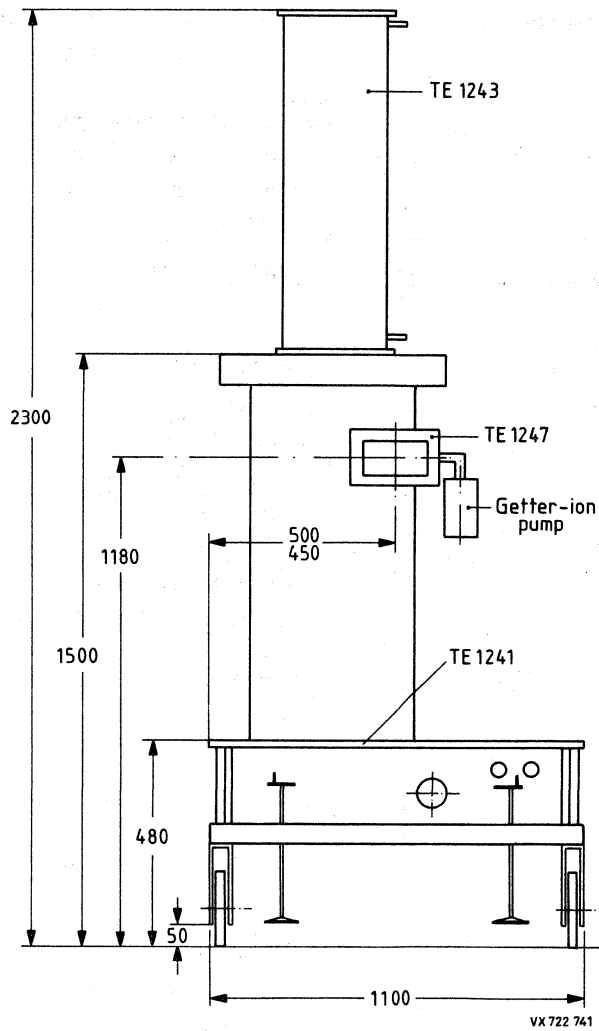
Complete assembly consisting of tube, trolley, oil tank, focus mount, r.f. transition and operational lead shieldings.
